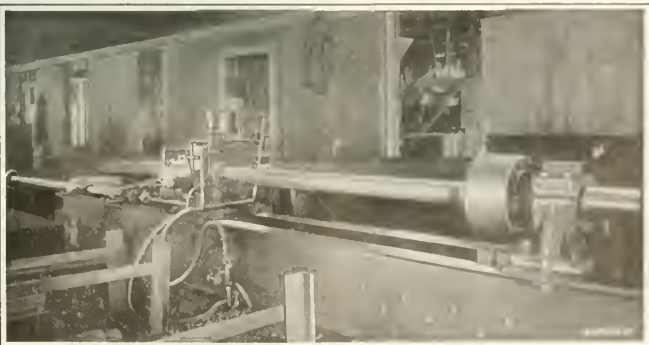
Southwark Cutting-off Machine of the Single-head Type
